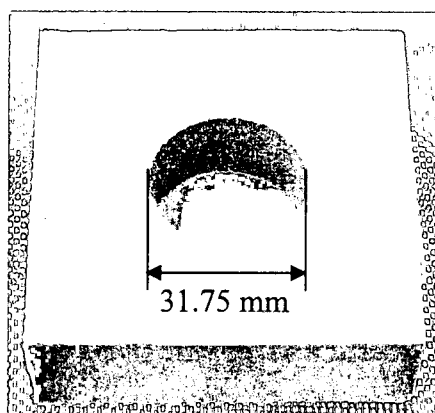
A typical silicon rubber mold used to cast the epoxy disk specimens.
